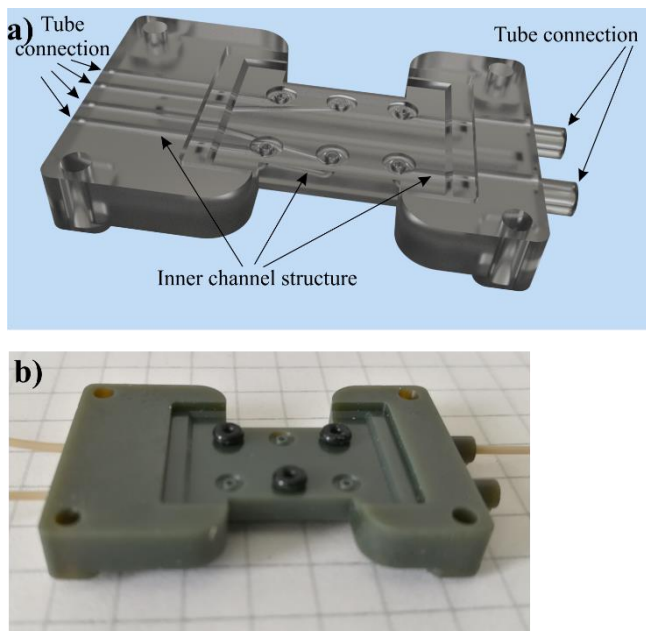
A microfluidic chip holder ($\sim 3.5 \times 2 \text{ cm}^2$) containing an integrated channel structure to connect the fluidic inlets and outlet of a chip to a tubing. a) A 3D rendered image visualising the inner channel geometry. b) A photo of the holder and O-rings placed in their recess.
